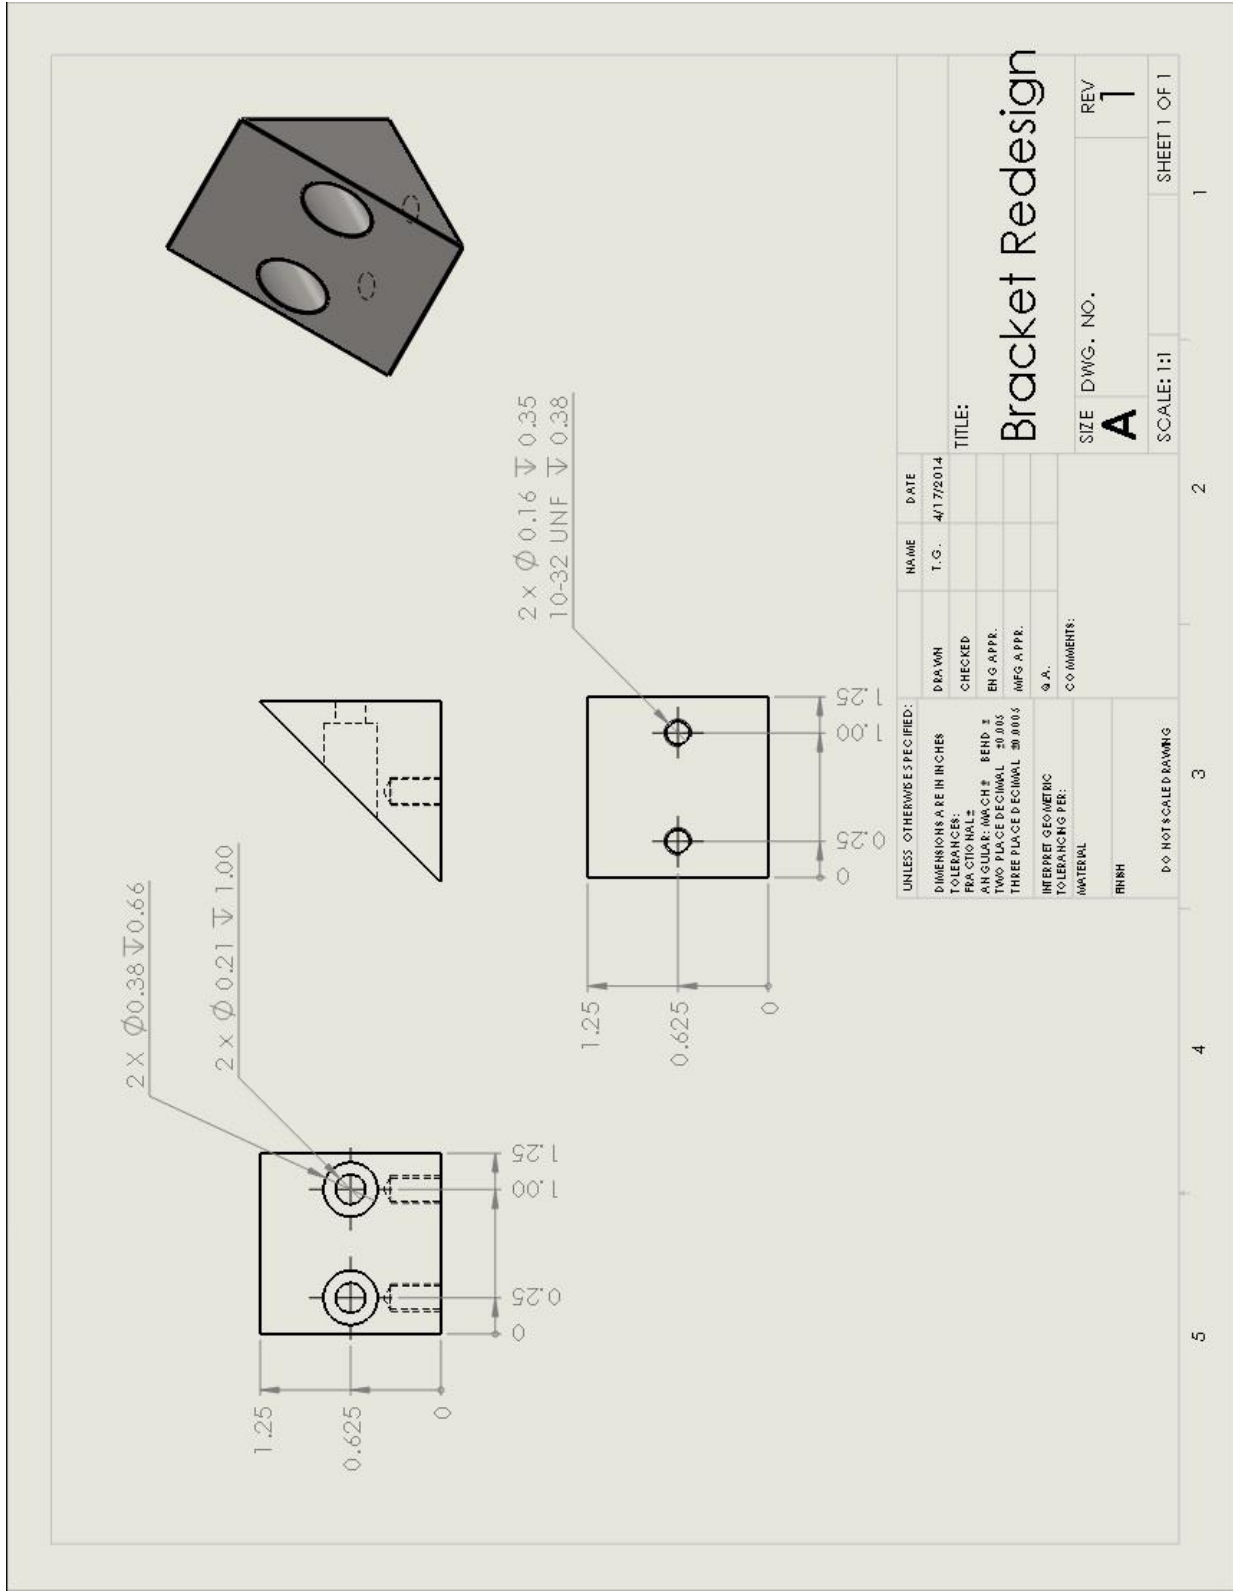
Engineering Drawing of Triangular Bracket Redesign
